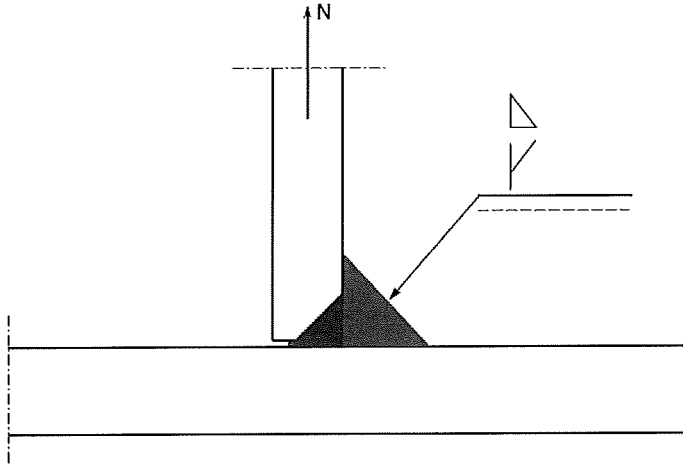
T-joint with one-sided weld; partial penetration weld with additional reinforcing fillet weld.
